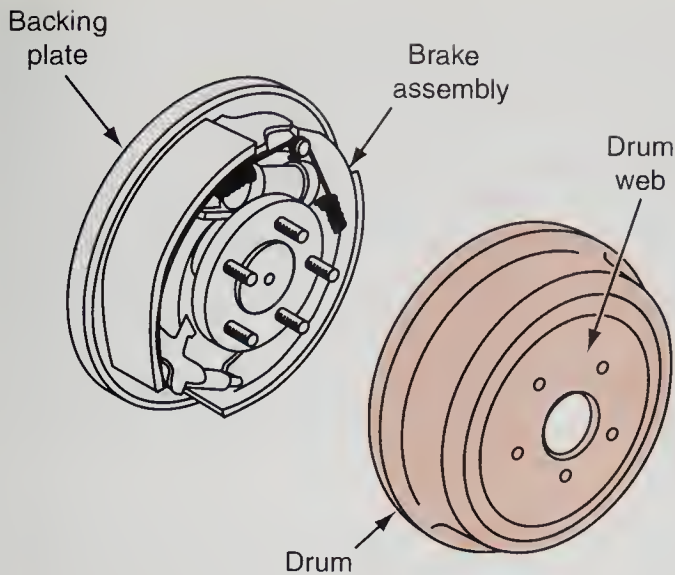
The drum fits over the brake shoes and other parts mounted on the backing plate.
